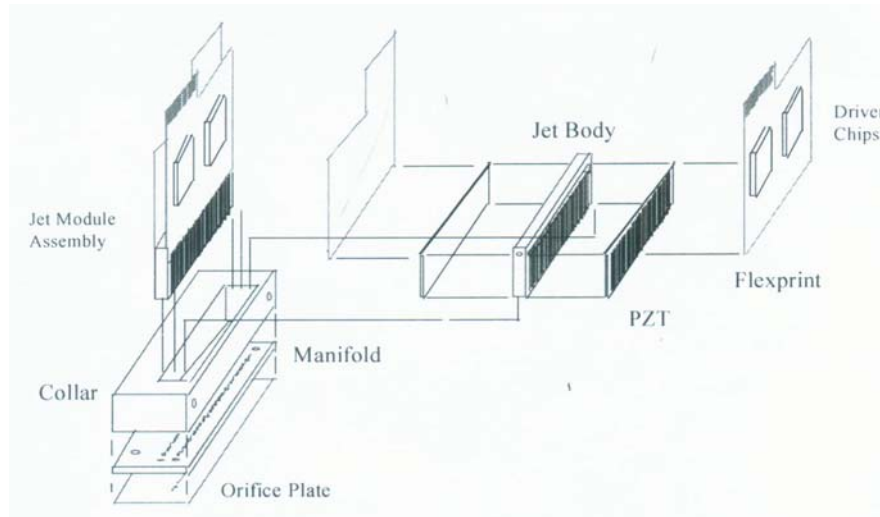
Exploded view of Nova-Q JA128/80 AQ [80]
